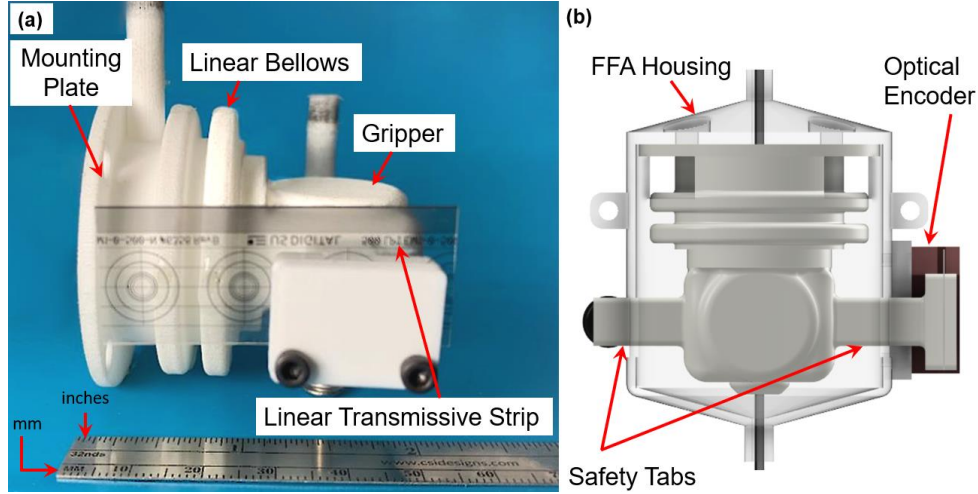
(a) SLS 3D printed flexible fluidic actuator with attached linear transmissive strip, (b) CAD model of the flexible fluidic actuator, its housing with mounted linear optical encoder
